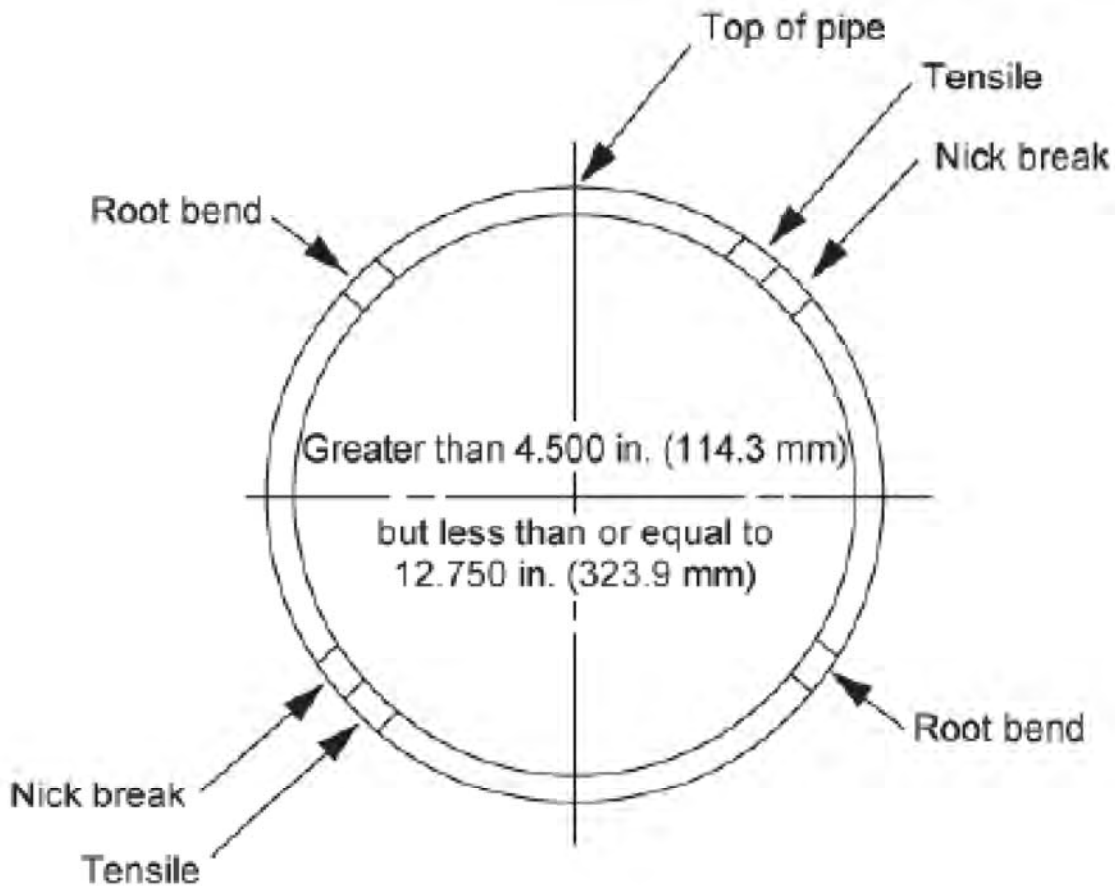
Location of SMAW Welder Qualification Butt Weld Test Specimens
